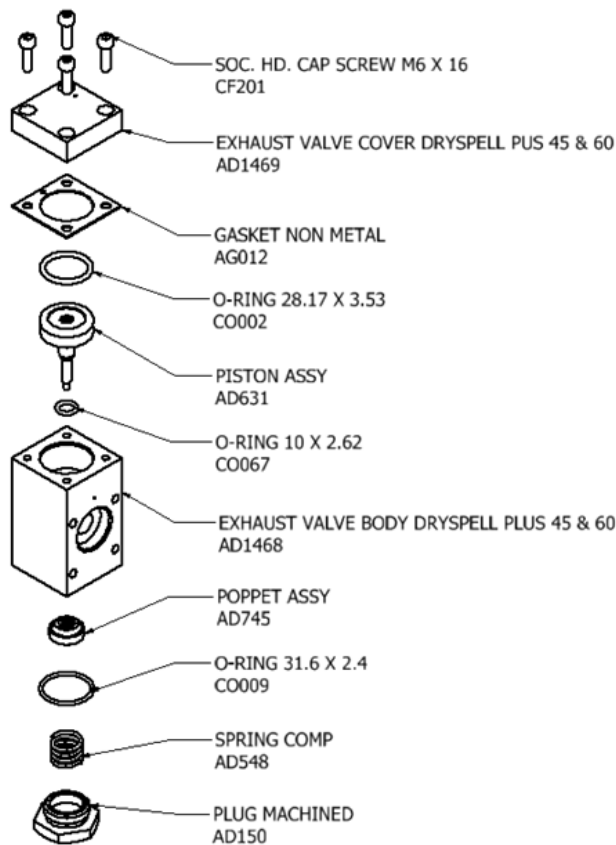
Exploded view of exhaust valve- Dryspell Plus models 45 and 60
